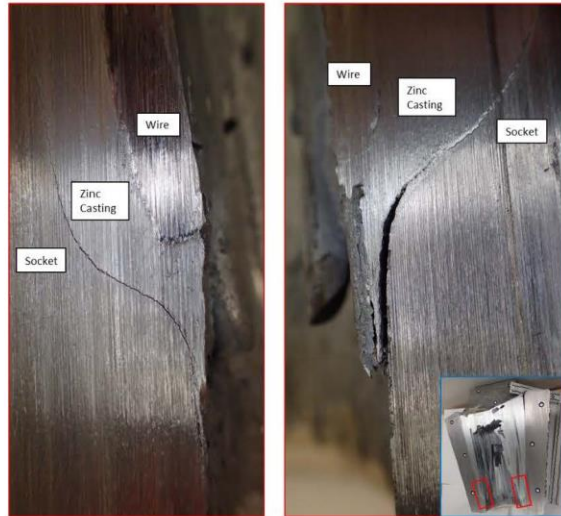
Close up view of the tight gap present between the socket wall inner diameter and the zinc casting outer diameter, just inside the socket base. These images were taken from the 9 o'clock half – 12 o'clock is on the left and 6 o'clock is on the right.
